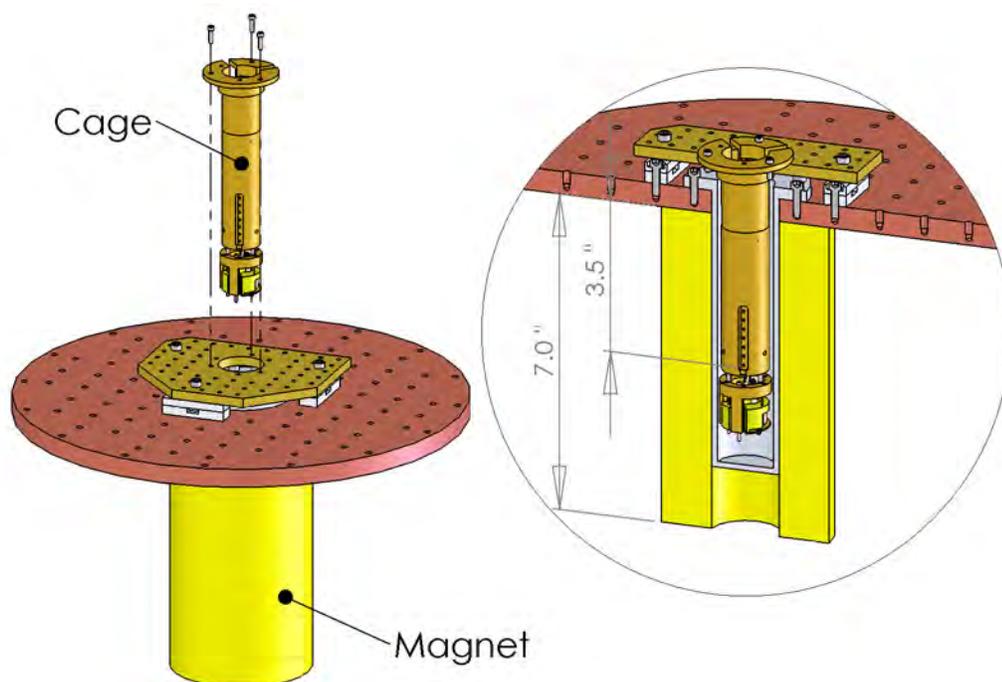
Exploded view of assembled microscope and coldplates. (inset) Cutaway of coldplates and magnet showing position of microscope cage and head. The dimensions of the cage, Macor stands, and He-3 coldplate, are such that the sample sits 3.5" below the bottom of the coldplate and in the maximum field of a 7" tall superconducting magnet.
